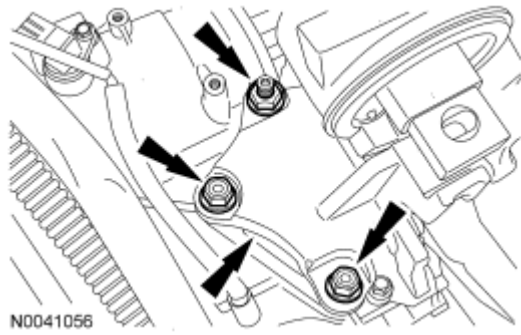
Locating Transaxle Insulator Bracket And Nuts
